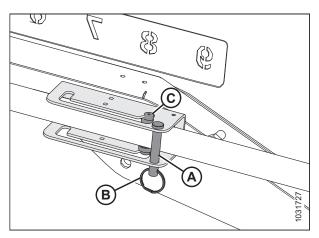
Fore-Aft Cylinder Adjustment Type 2 – Aft Position
